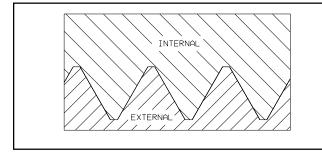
NPTF: Wrench Tight-Crest to Root and Flank Contact
